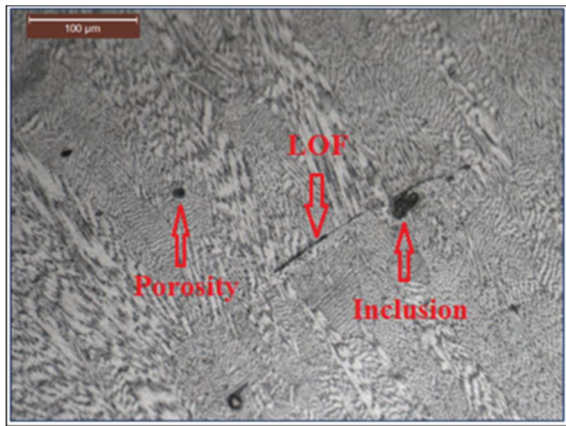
Optical microscopy image showing some defects in IN625 Samples 3D printed using SLM
